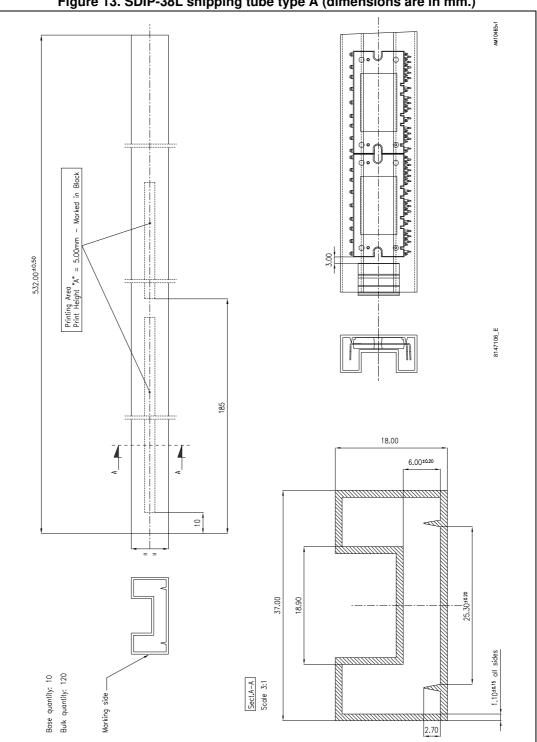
SDIP-38L shipping tube type A (dimensions are in mm.)
